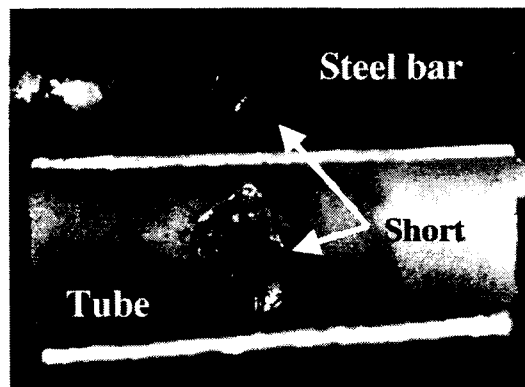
Photograph of short between steel bar and tube in tubular heating element
